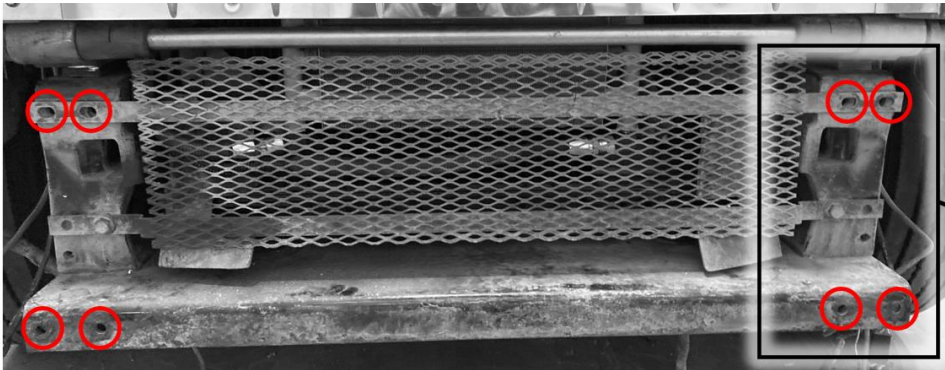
Main Bracket Mounting – Truck with 8 Front Bumper Fasteners
